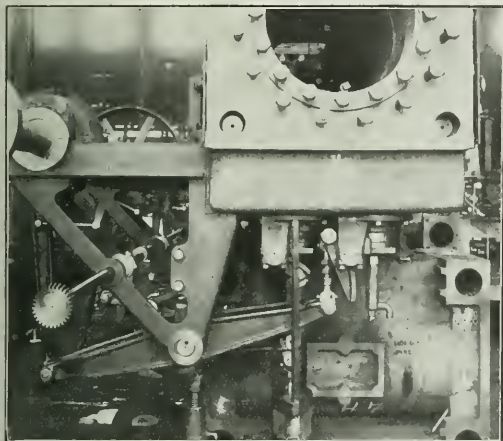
Valve Gear, with Exhaust Valve Cam in "Pause" Position.
